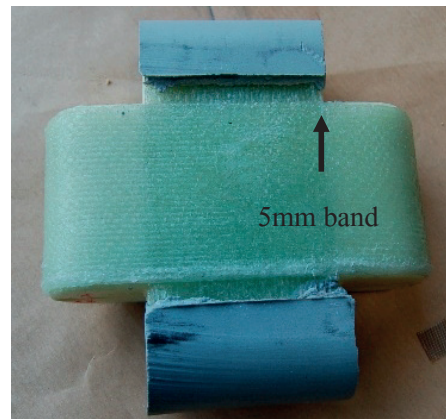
Specimen with adhesive layer and 5-mm failure band.
